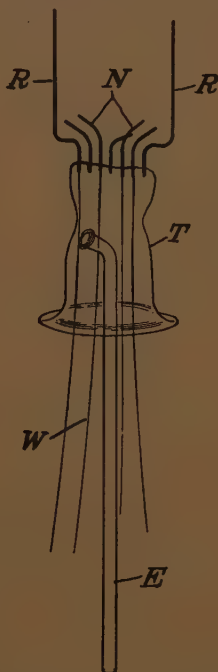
Position of supporting posts for attachment of filament, grid and plate.
